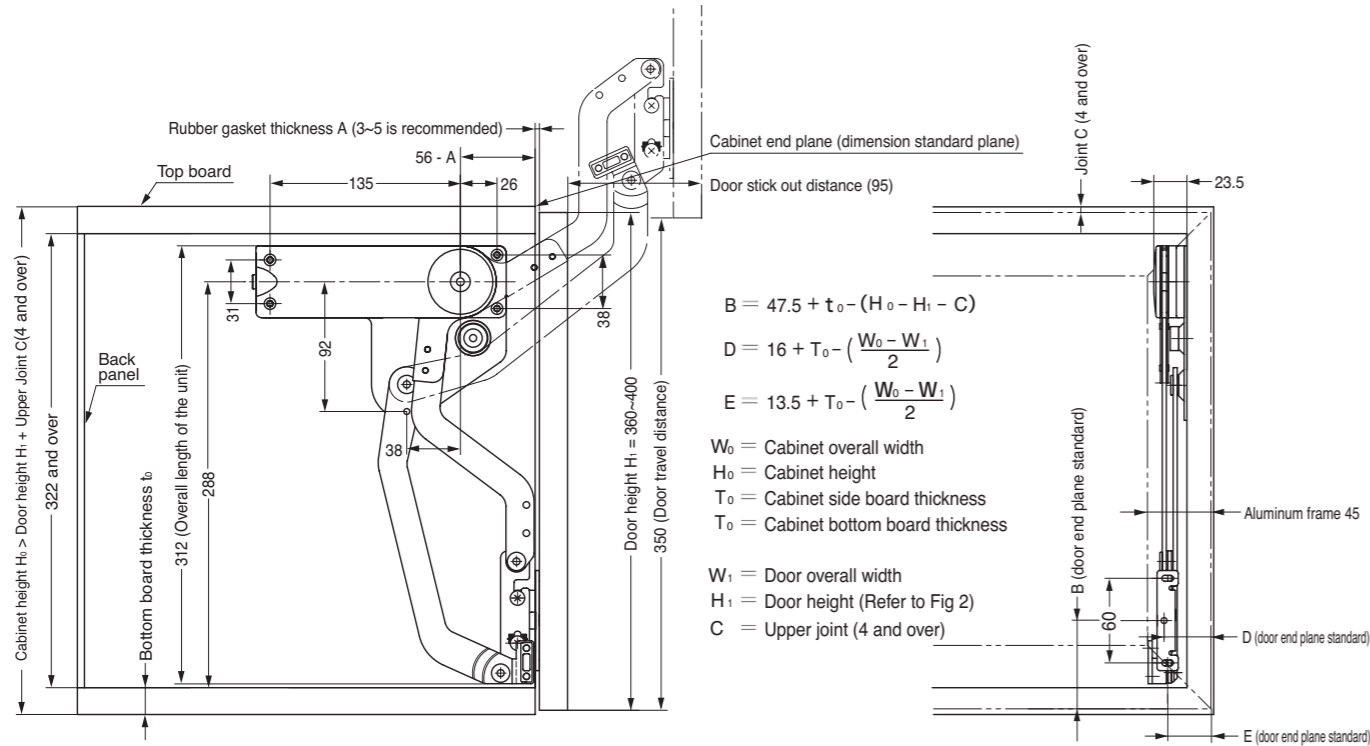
Mounting dimensions for installing to 45mm width aluminum frame door or solid wooden door
